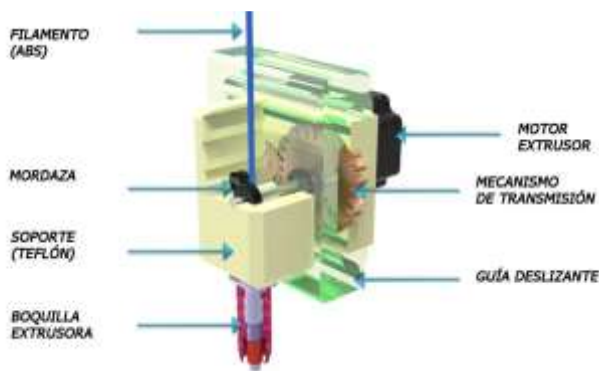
Extrusion Mechanism. (Jersson Xavier León Medina)
